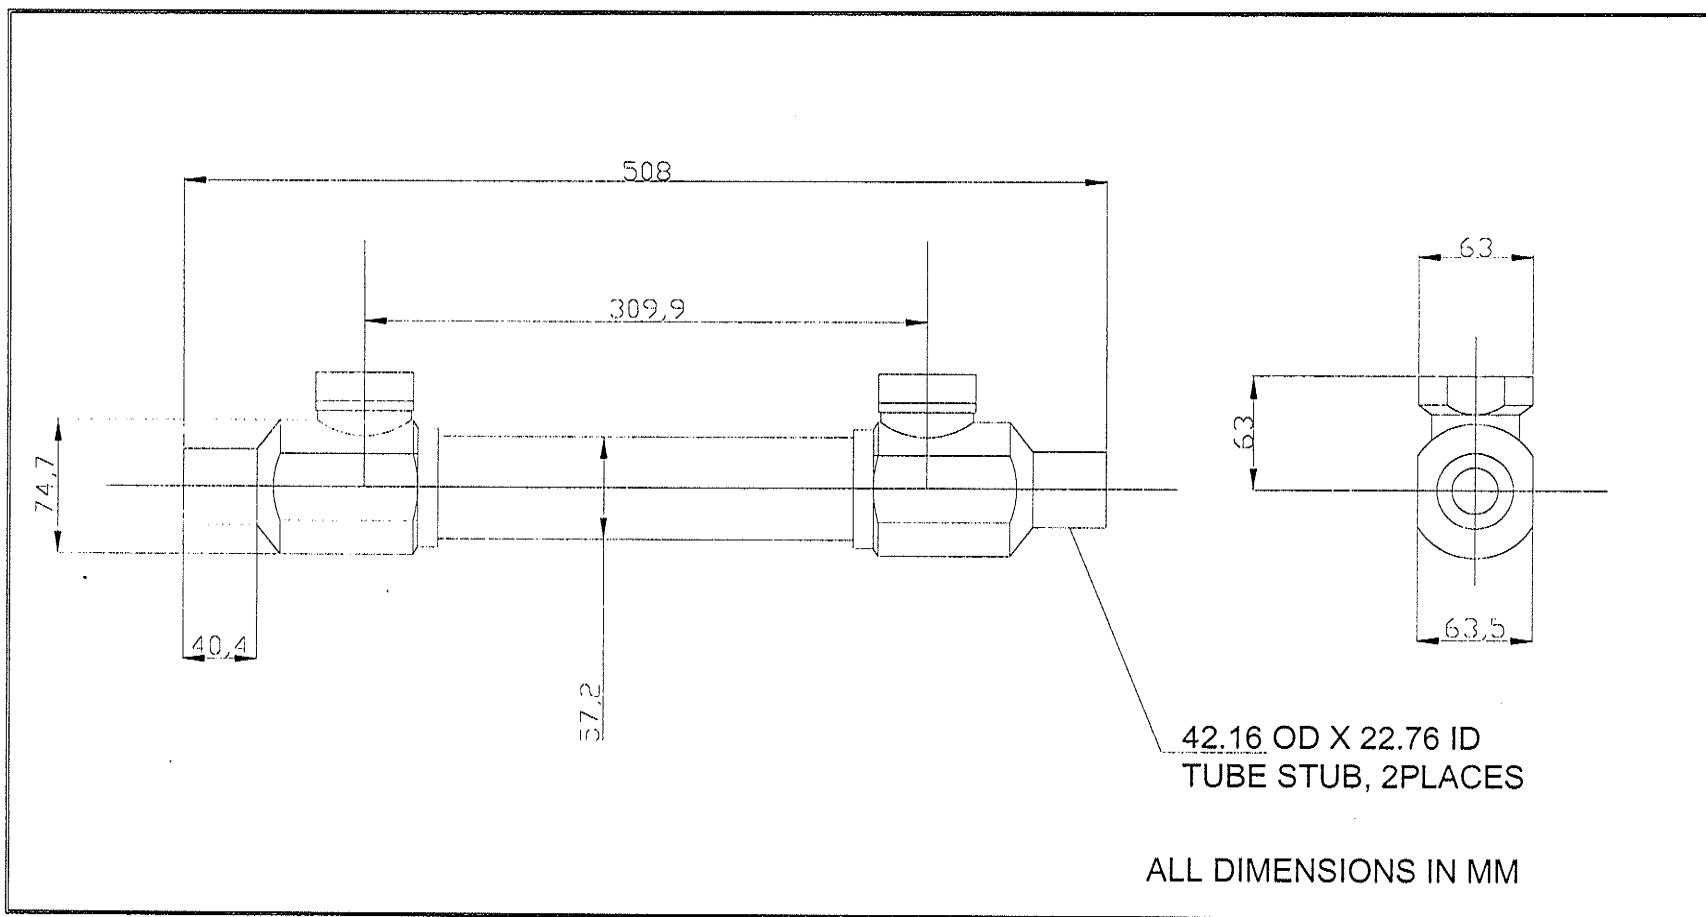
Schematic drawing of shell and tube heat exchanger.
